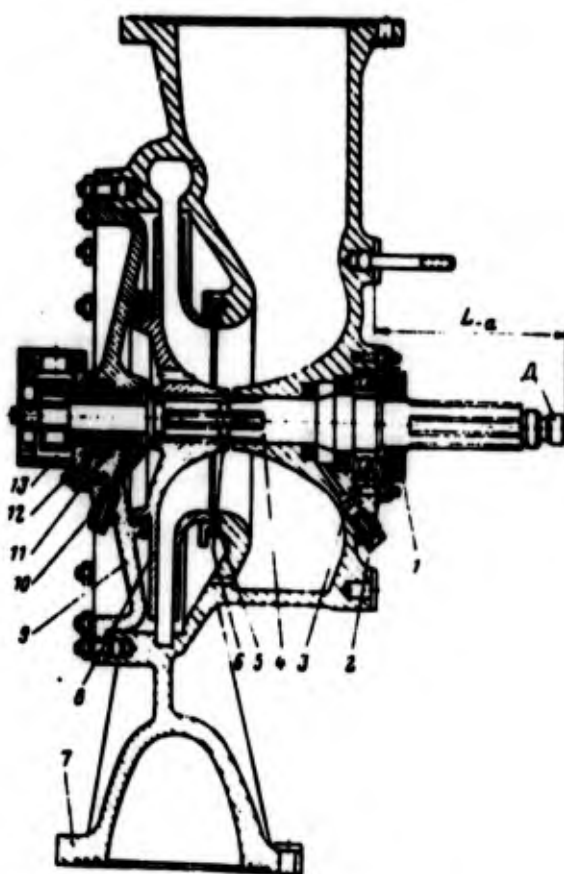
Fuel pump: 1, 9 - covers; 2 - sealing bushing; 3 - ball bearing; 4 - pump spindle; 5 - sealing ring; 6 - regulating ring; 7 - casing of pump; 8 - impeller; 10 - nut; 11 - sealing ring; 12 - ball bearing; 13 - regulator of number of revolutions of the turbopump unit.
